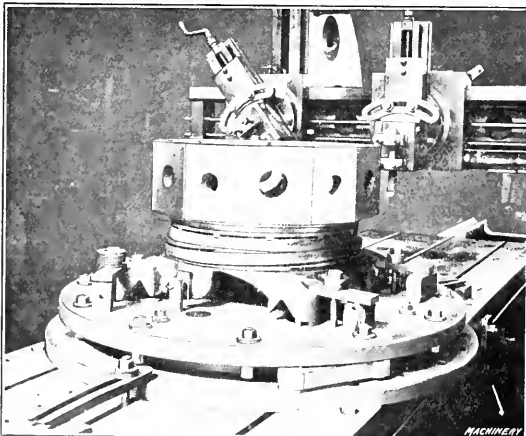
Testing Accuracy of Teeth and Spaces of Turret and Slide
